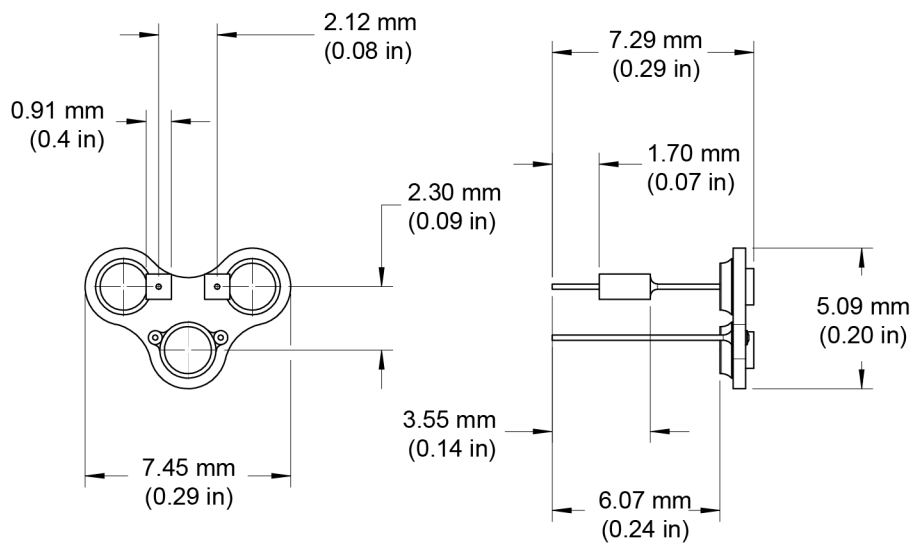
N2851A QuickTip Probe Head and N2849A QuickTip Dimensions
